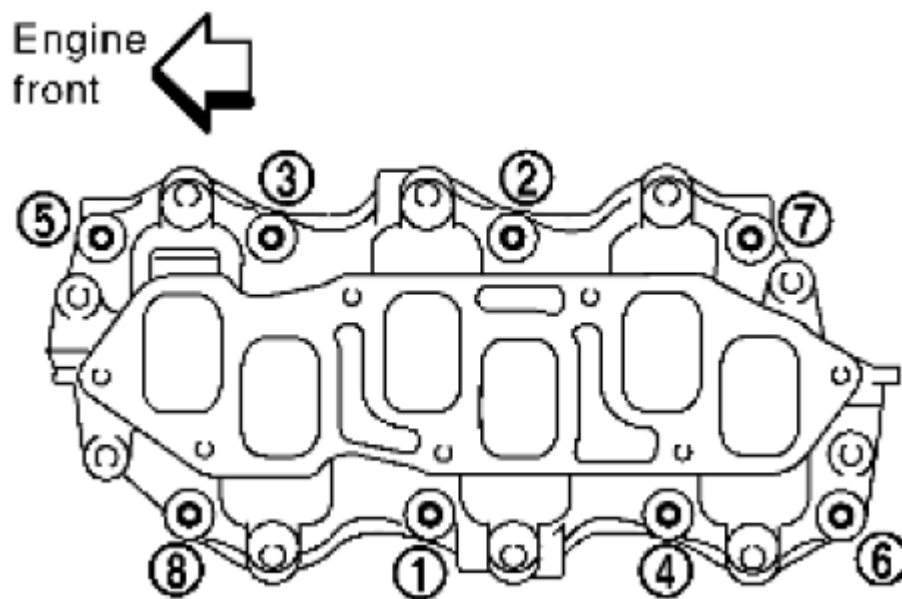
Identifying Intake Manifold Nuts And Bolts Tighten Sequence
